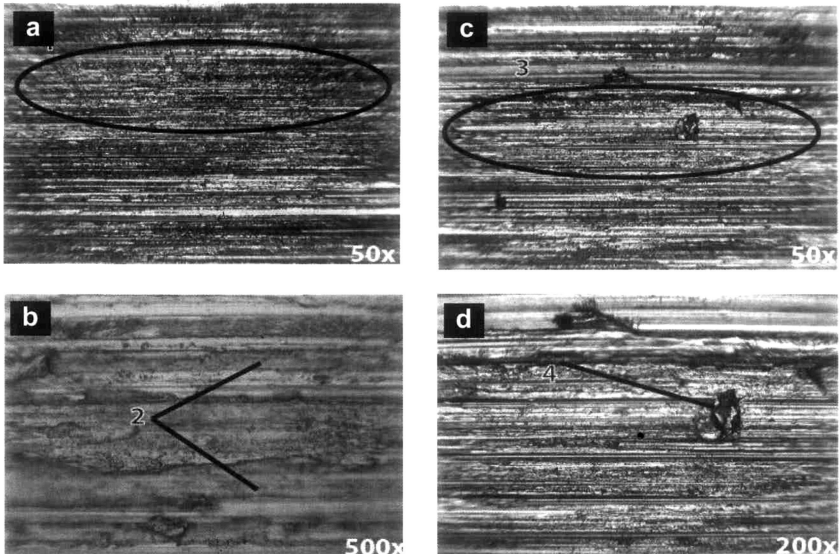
Microscope Photograph of a Specimen Machined under LCO_2 Coolant
